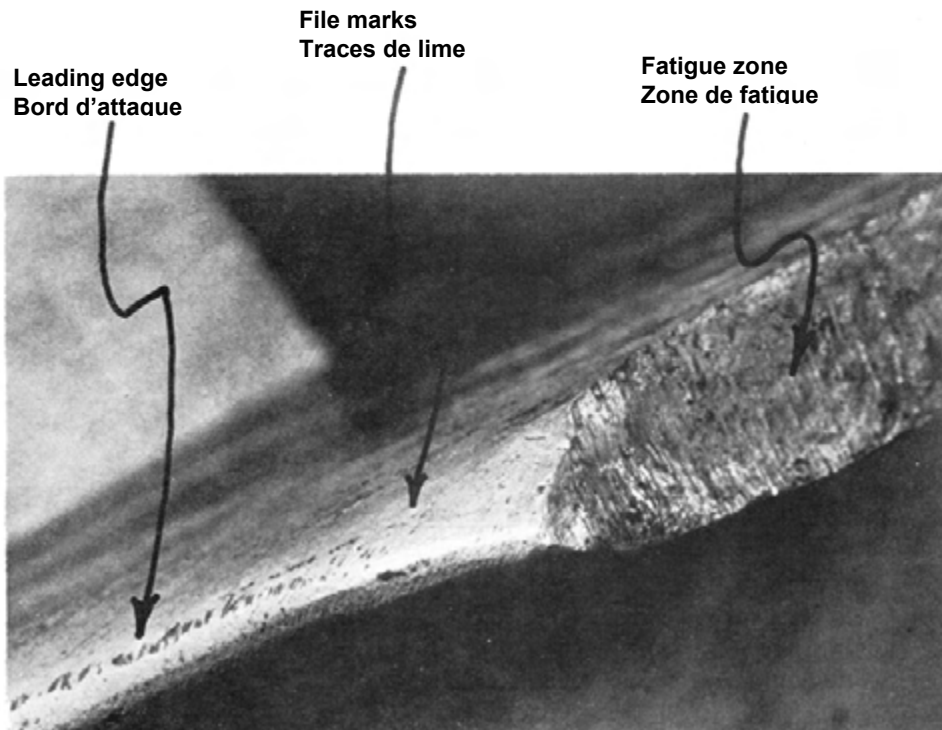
A-38 Fatigue failure of propeller blade
